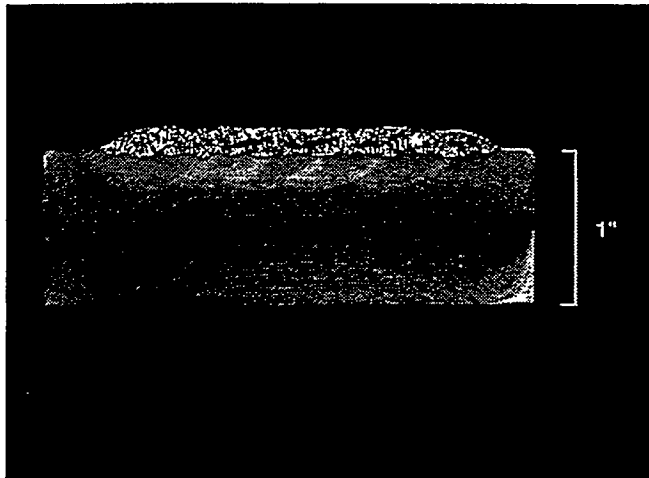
Multipass weld pad produced with composite filler metal using the automatic gas metal arc process on 2 1/4 Cr-1 Mo base plate.
